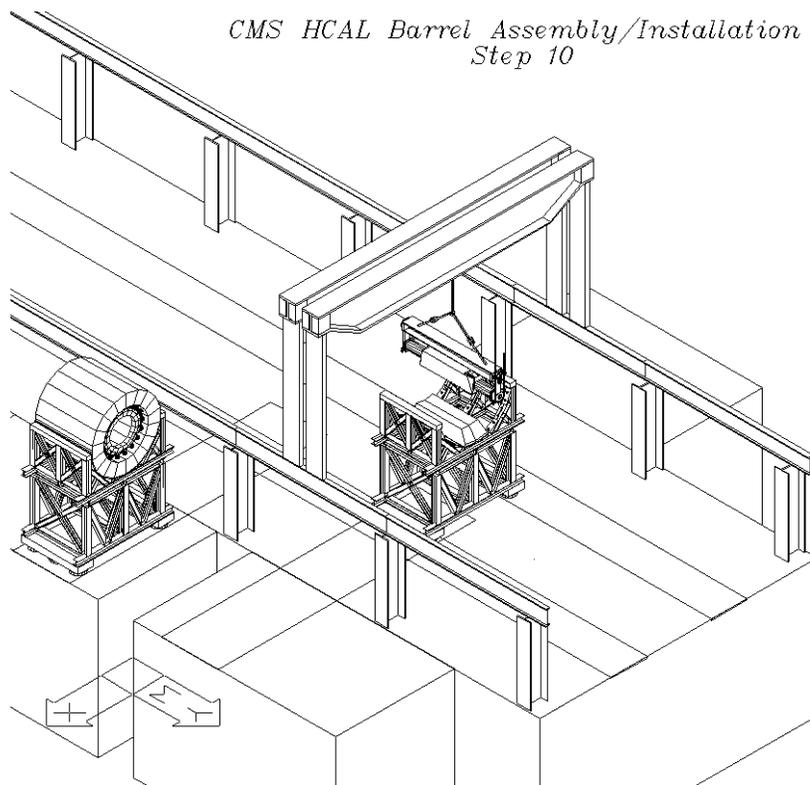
CMS HCAL barrel assembly / installation step 10.
